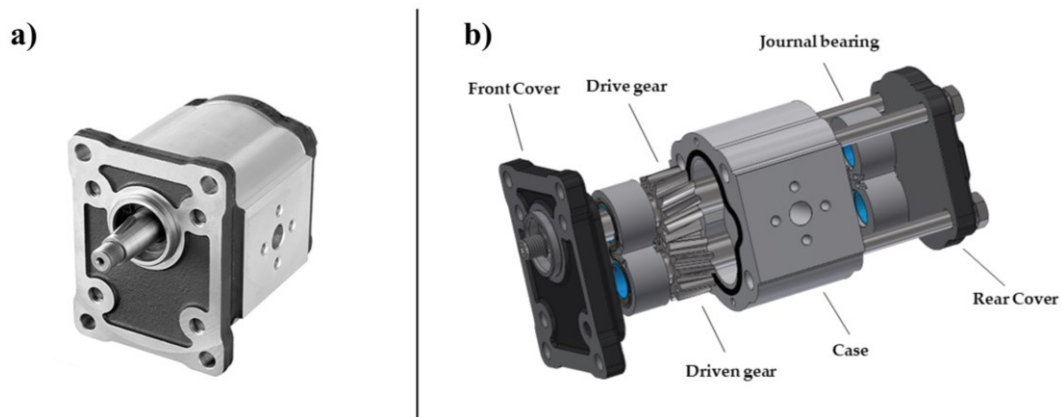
Reference helical EGP: a) physical aspect; b) exploded vision.
